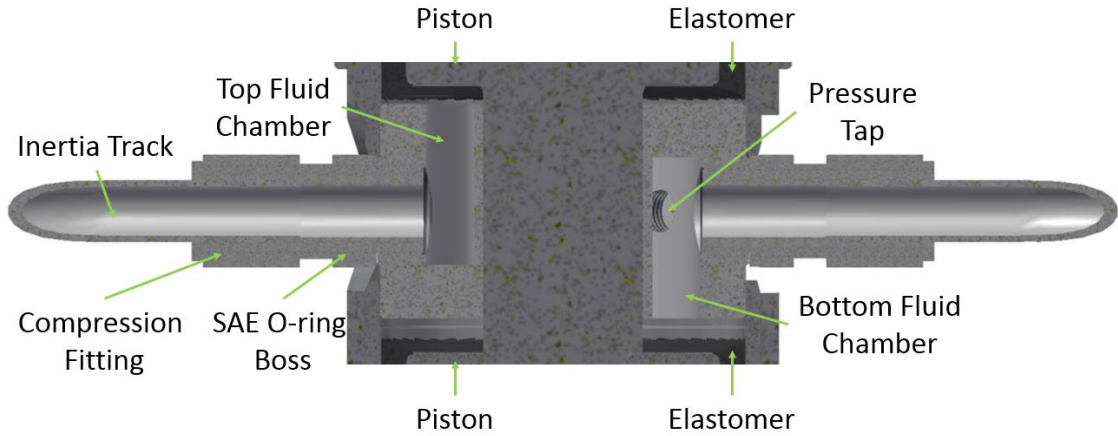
CAD model of a fluidic pitch link cross-section.
